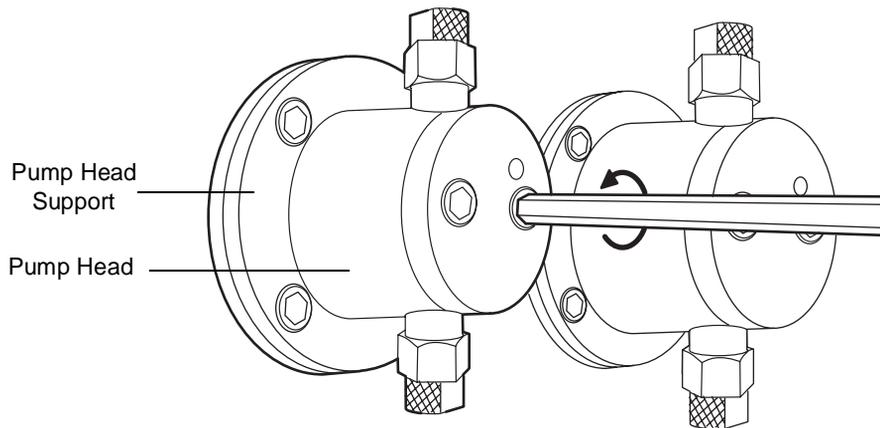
Removing Head Bolts (1525 Analytical and 1525EF Shown, 1525 μ Similar)
